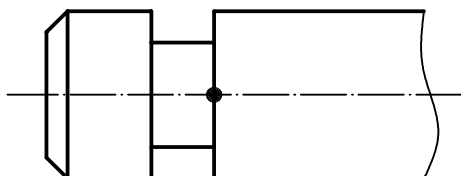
Flanged piston rod end with TRP at the shoulder level
